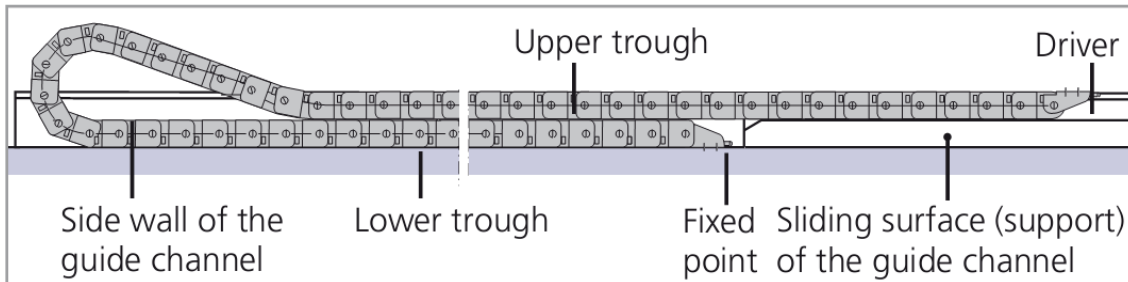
Cable track system for routing connections between moving machines. Drawing source: www.kabelschlepp.de.
